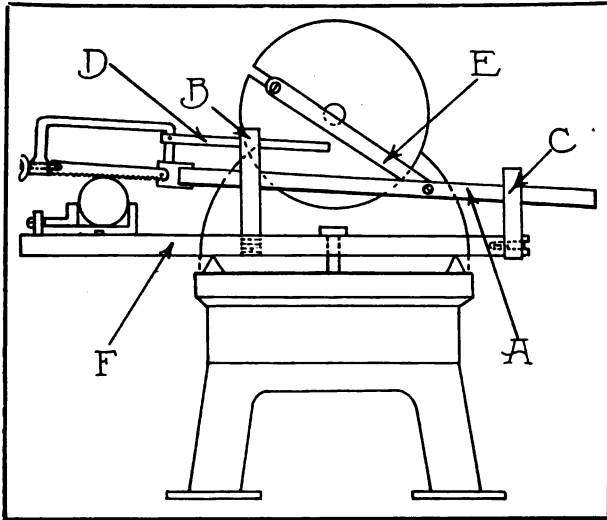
How to Attach a Hacksaw to a Lathe for Power.
